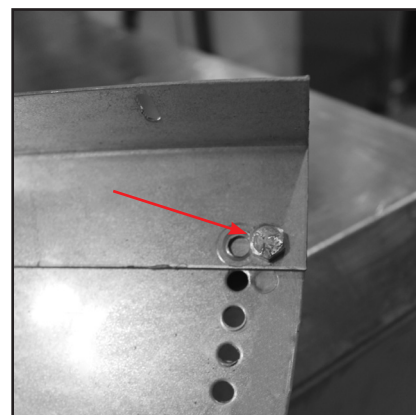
Remove screws from Sheet Metal Frame purge section.
